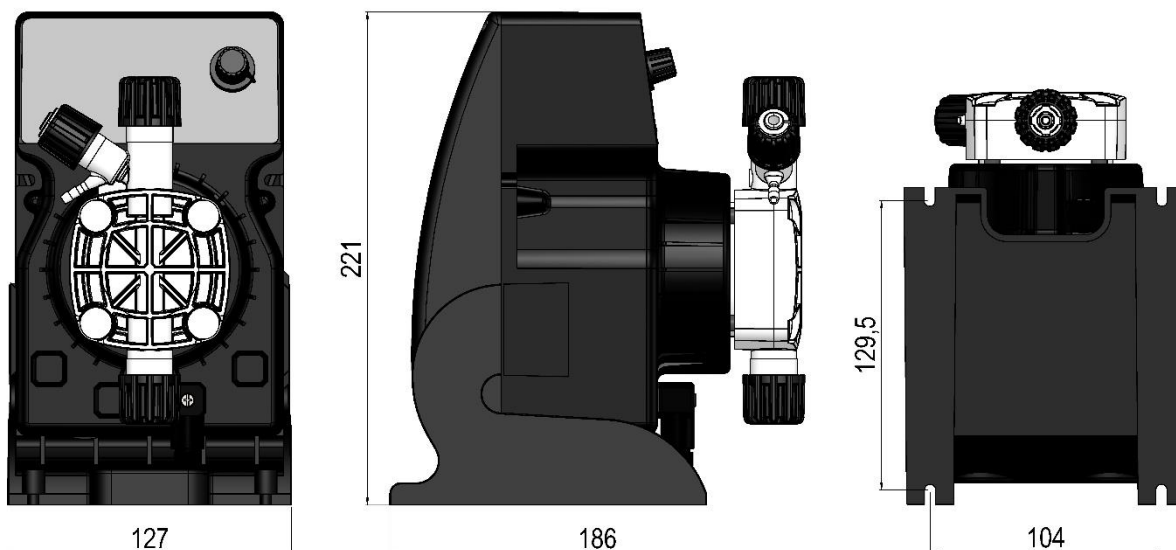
PBM pump, base-mounted (dimensions indicated in mm.).
